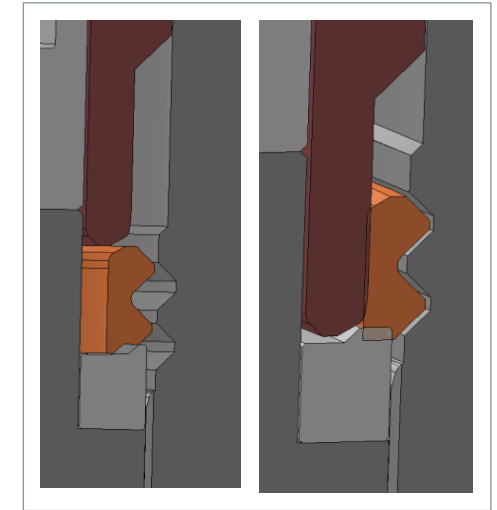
Section cut of XT spool; showing location of grooves which split lock ring engage into. [6]
